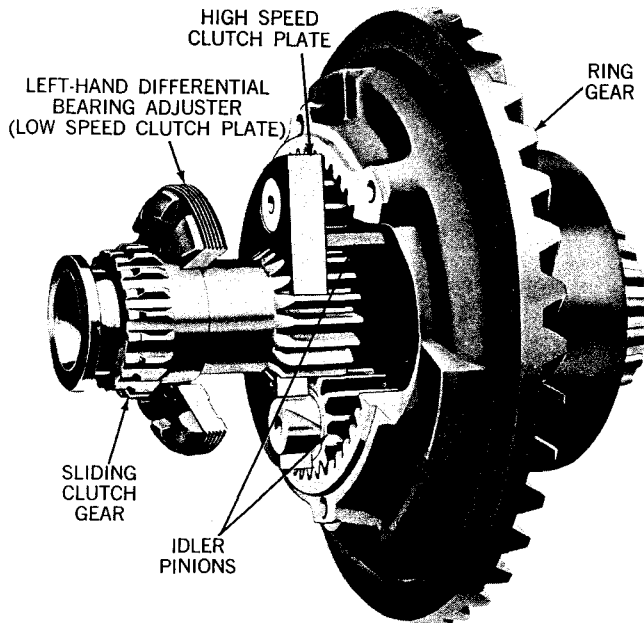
Sliding Clutch Gear Position for High Axle Ratio
